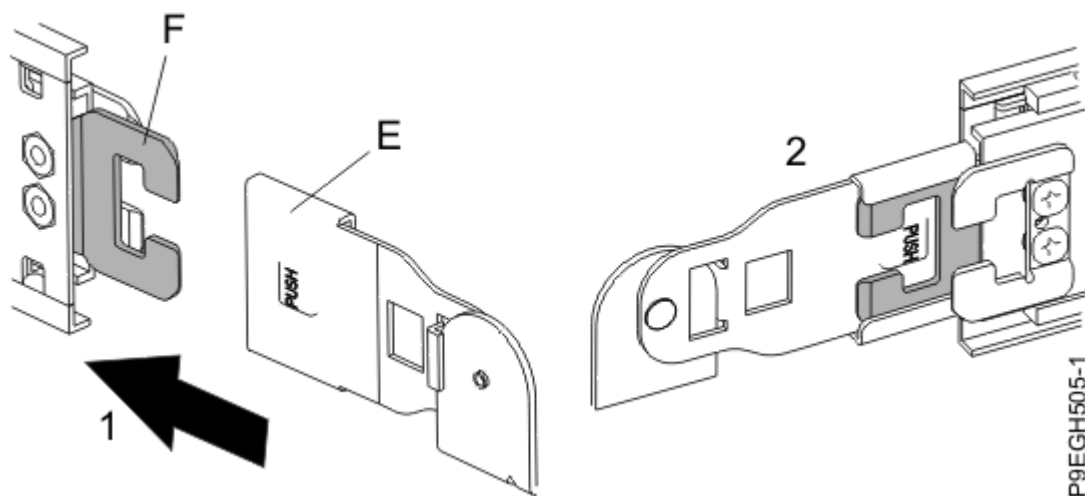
Attaching the extension tab to the cable management arm to the outer cable management arm tab
